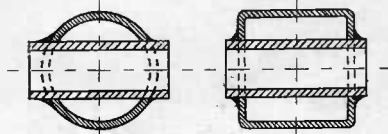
(above): Sections through bolt bosses formed by welding-in short cross-tubes. There is less interruption of the tube material when the original member is square instead of round.
